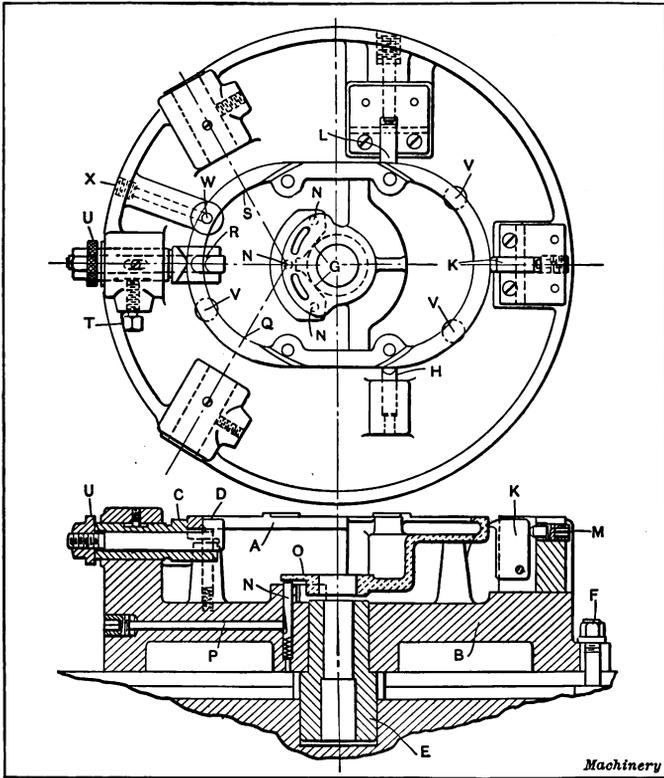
Ingenious Chucking Device for holding Odd-shaped Aluminum Casting without Distortion
